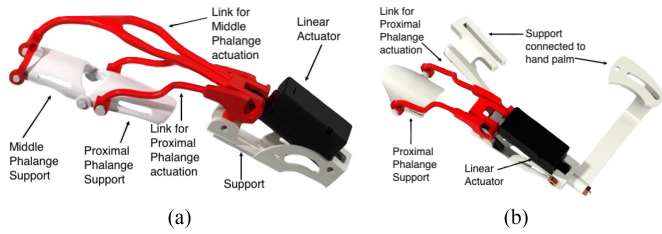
Hand module. (a) CAD model of single-finger part. (b) CAD model of thumb part.
